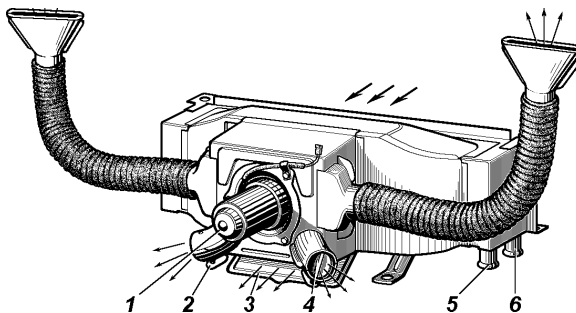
Cab heating and windshield demisting diagram: 1 -fan motor; 2 -shutter handle; 3 -lid; 4 -shutter; 5, 6 -radiator manifolds
